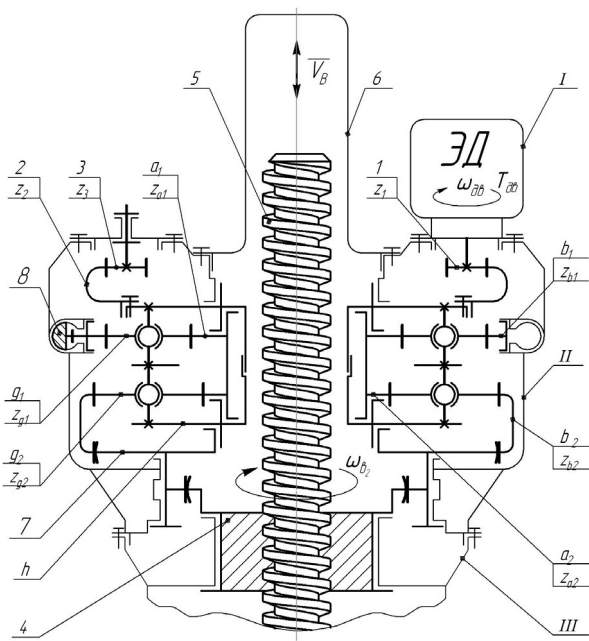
Kinematical scheme of a new multi-turn electric drive of isolation valve of pipeline transport with multi-threaded power transmission and parallel positioned axes of engine rotor and valve spindle:
